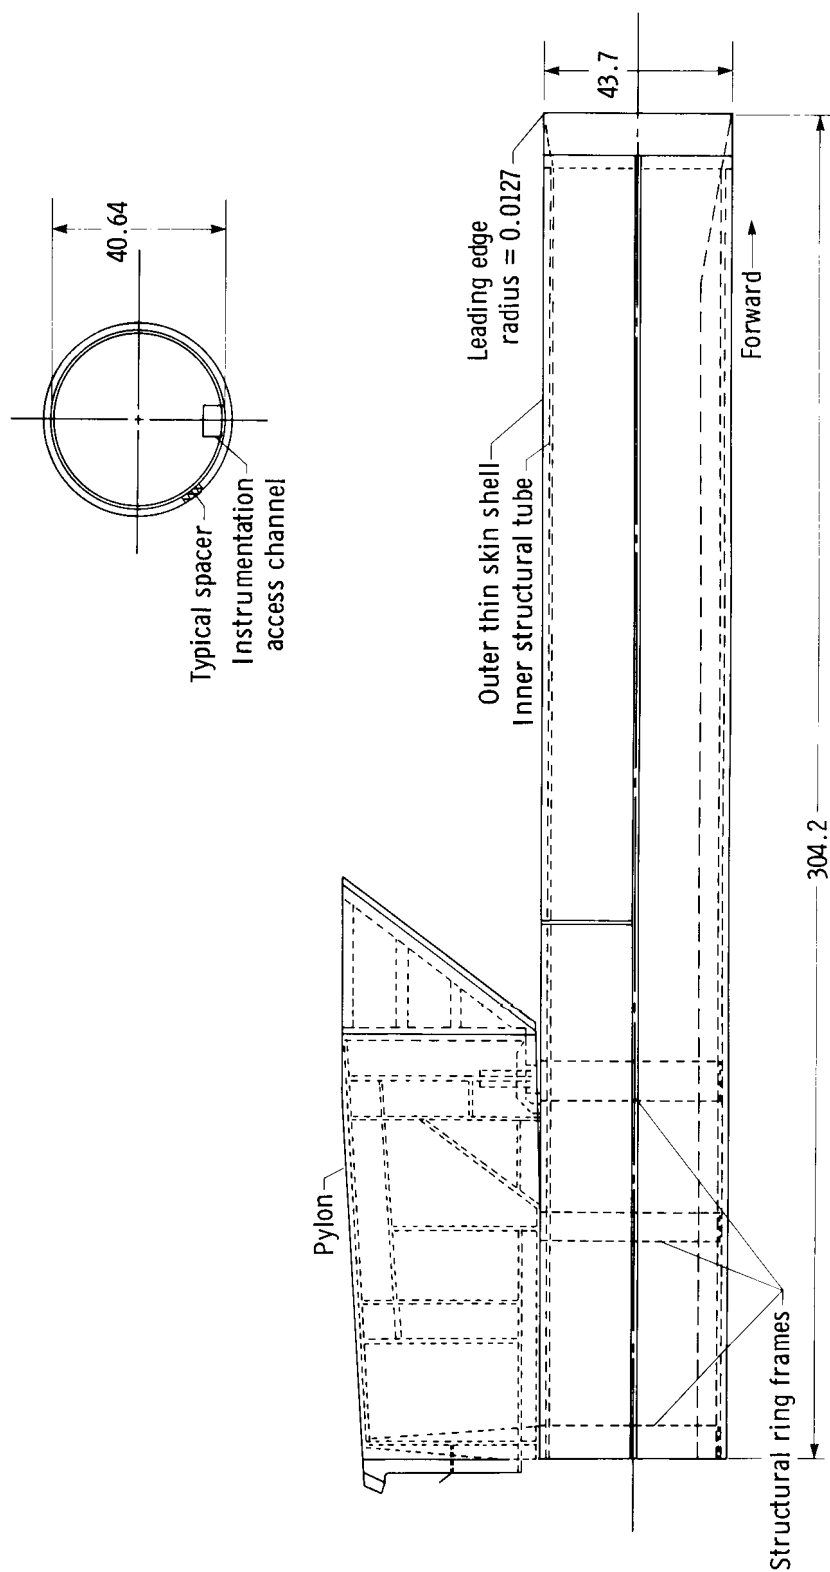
Structural configuration of test specimen. Dimensions in centimeters.
